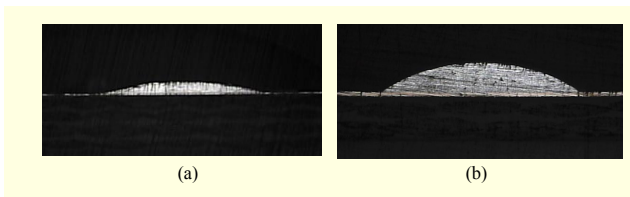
Wetting angles of SAC305 solder ball within resin on (a) Au and (b) Cu finish electrodes.
